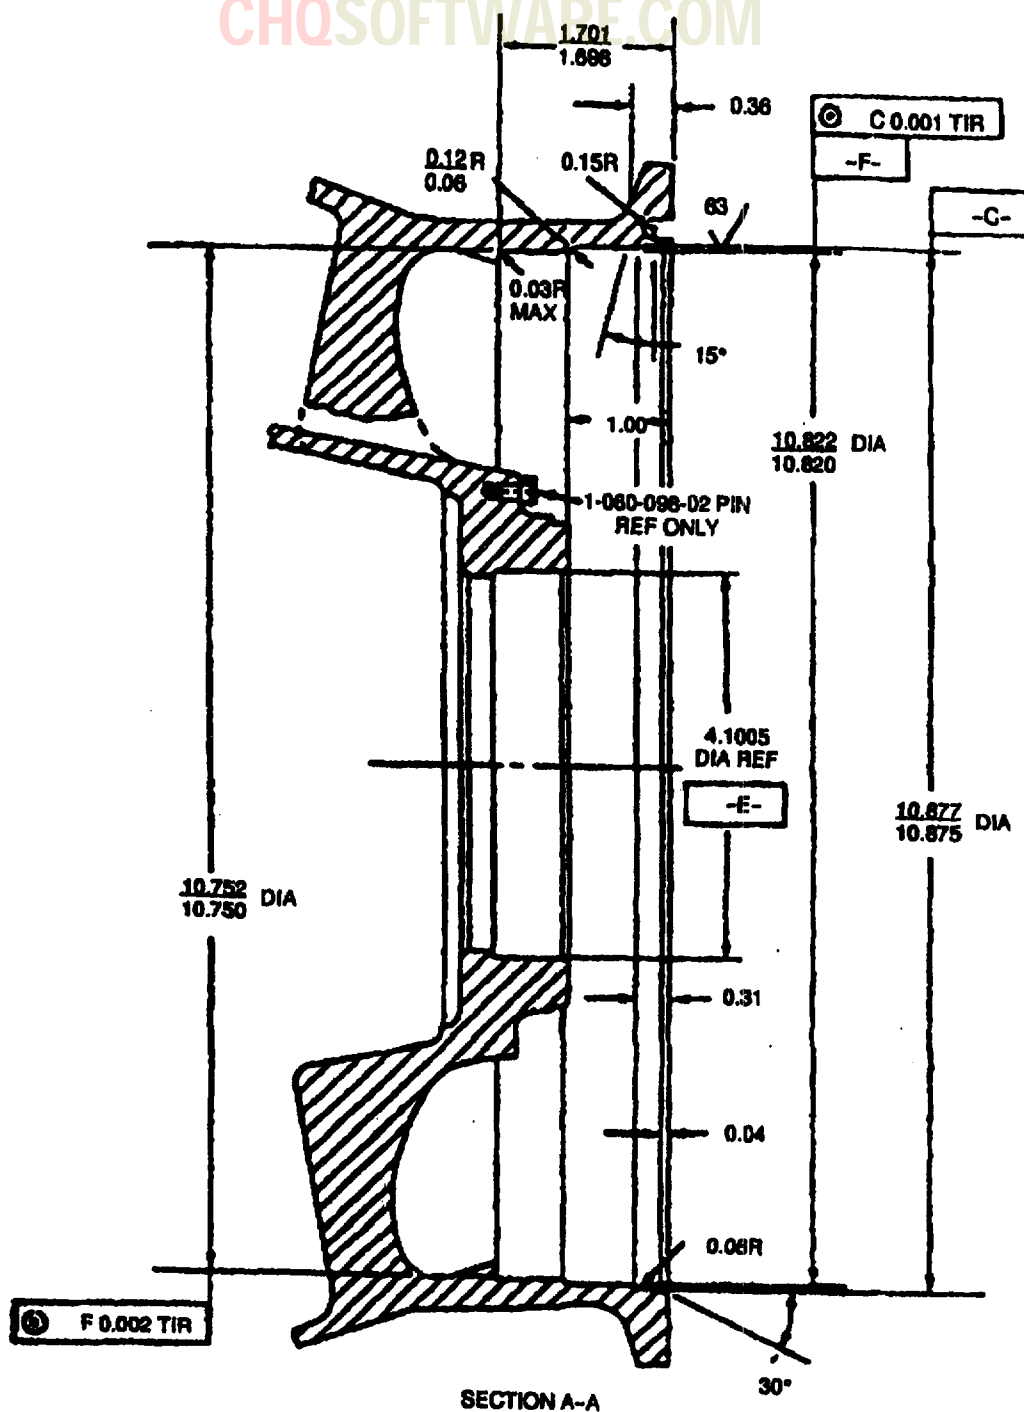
Inlet Housing Assembly - Rework (English) (Sheet 1 of 4).
